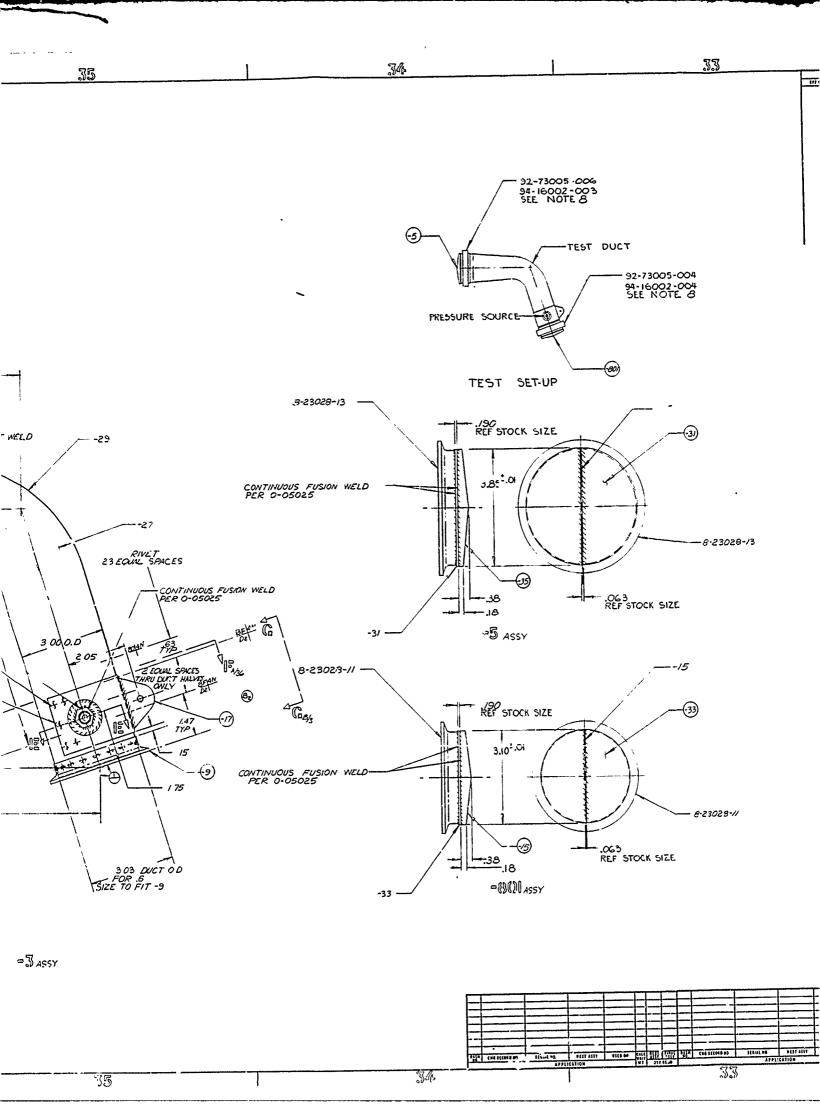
ENGINE-BLEED AIR DUCT; Brazed Assembly Engineering Drawing 29-01005, Sheet 3 of 3
